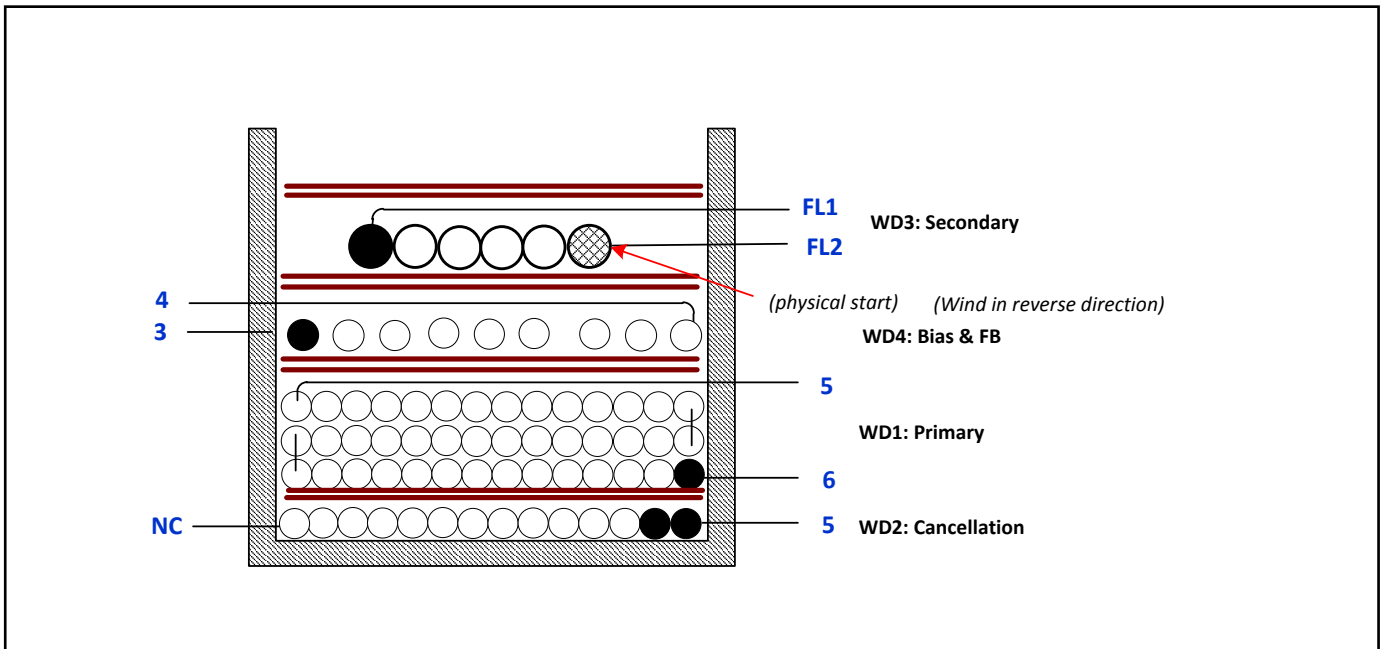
Typical Mechanical Construction of LinkSwitch-3 Transformer with Shield Winding.
